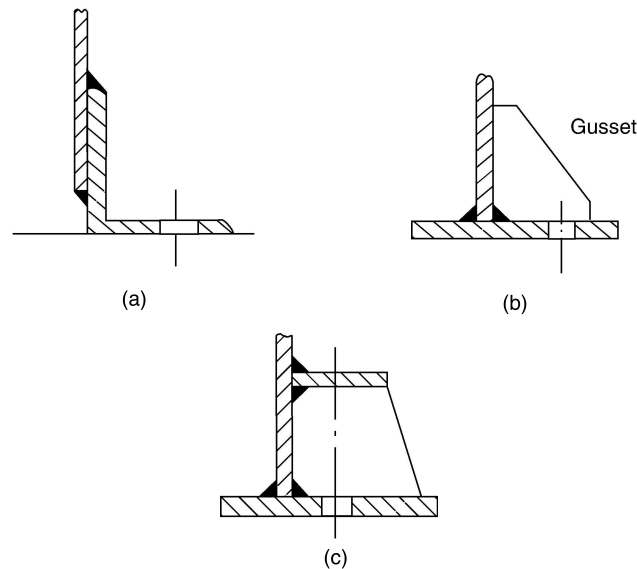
Flange ring designs (a) Rolled-angle (b) Single plate with gusset (c) Double plate with gusset
